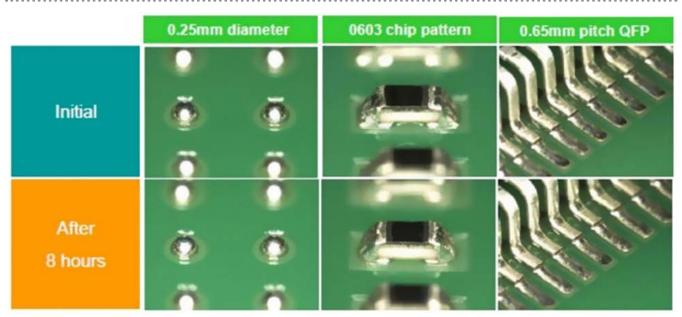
Sn58Bi Paste A wetting on 0603 [0201] chip and 0.65mm pitch QFP components at time zero and after eight hours of rolling the solder paste on the stencil before printing on the test board followed by reflow.
